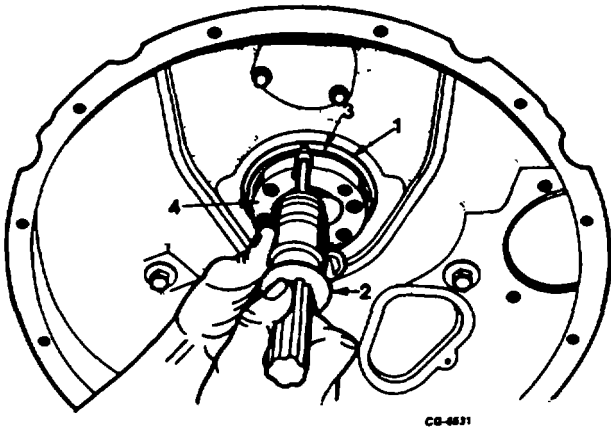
Removing Rear Main Oil Seal Using SE-2091 Seal Remover
